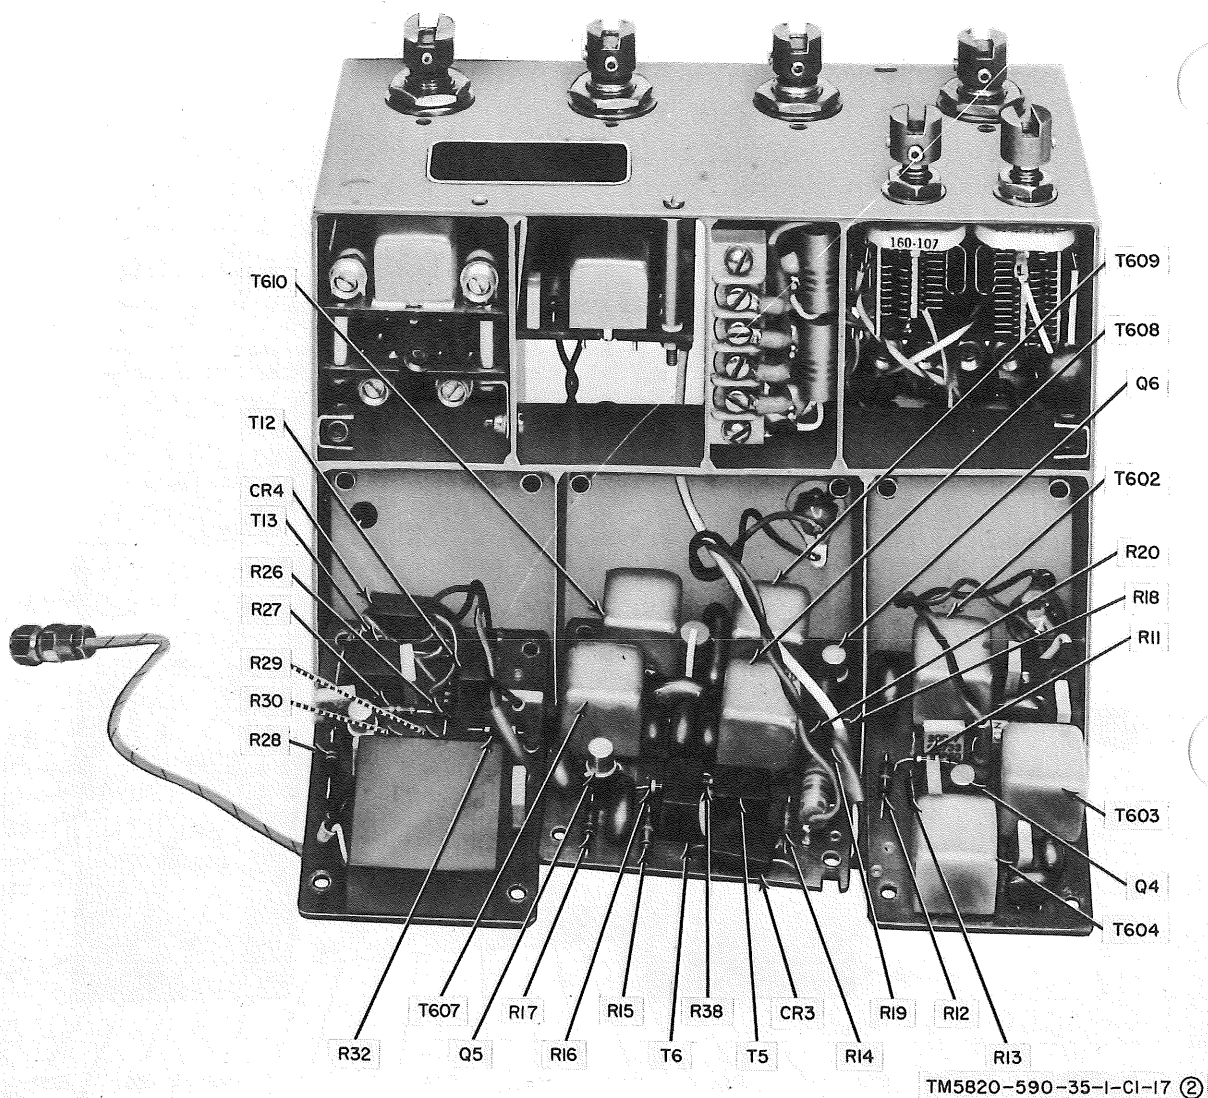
②. Frequency synthesizer module, bottom view, circuit boards removed (part 2 of 2).
